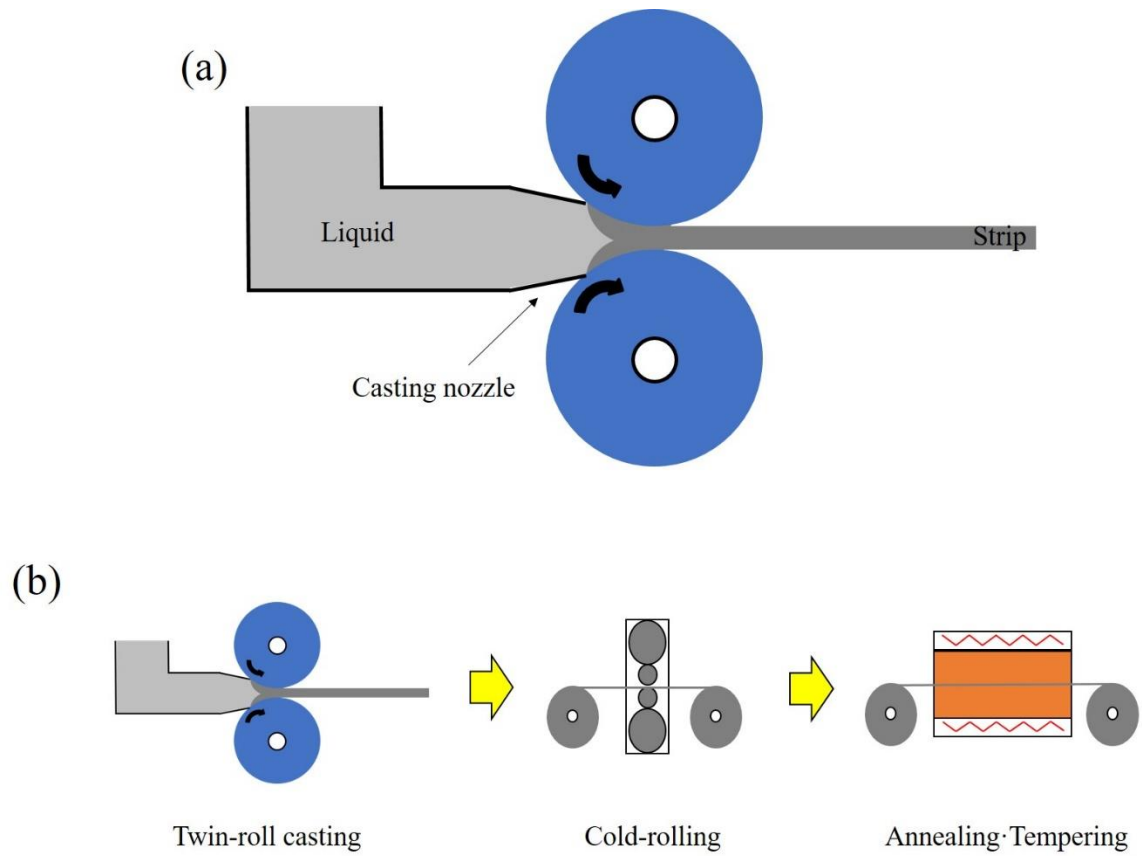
Schematic of the (a) twin-roll casting, (b) sheet manufacturing process flow by horizontal-type twin-roll casting.
